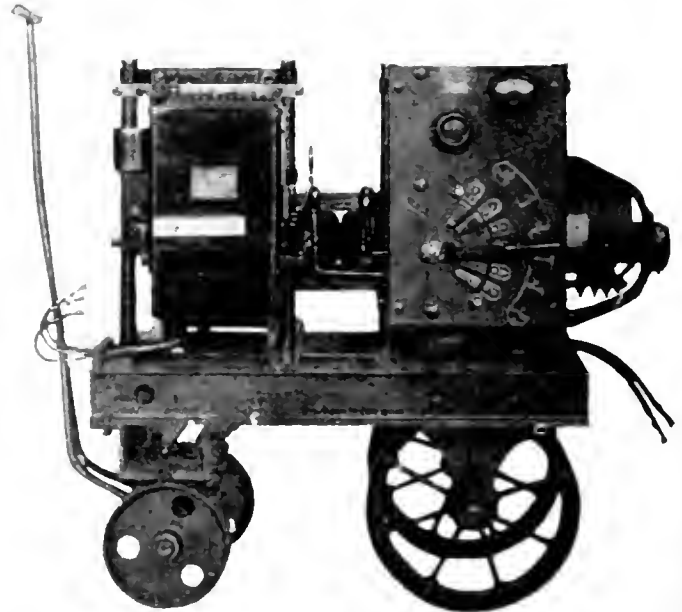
Front View of the Welding Outfit Shown in Fig. 7 as Mounted on a Truck for Portable Use
